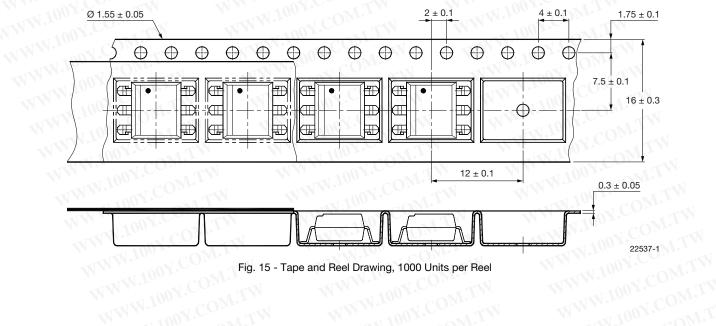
Tape and Reel Drawing, 1000 Units per Reel
